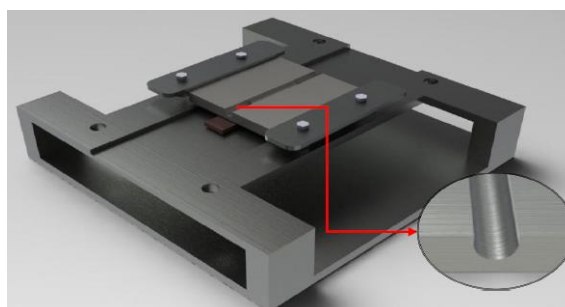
Schematic representation of the system used in the welding of test specimen.
